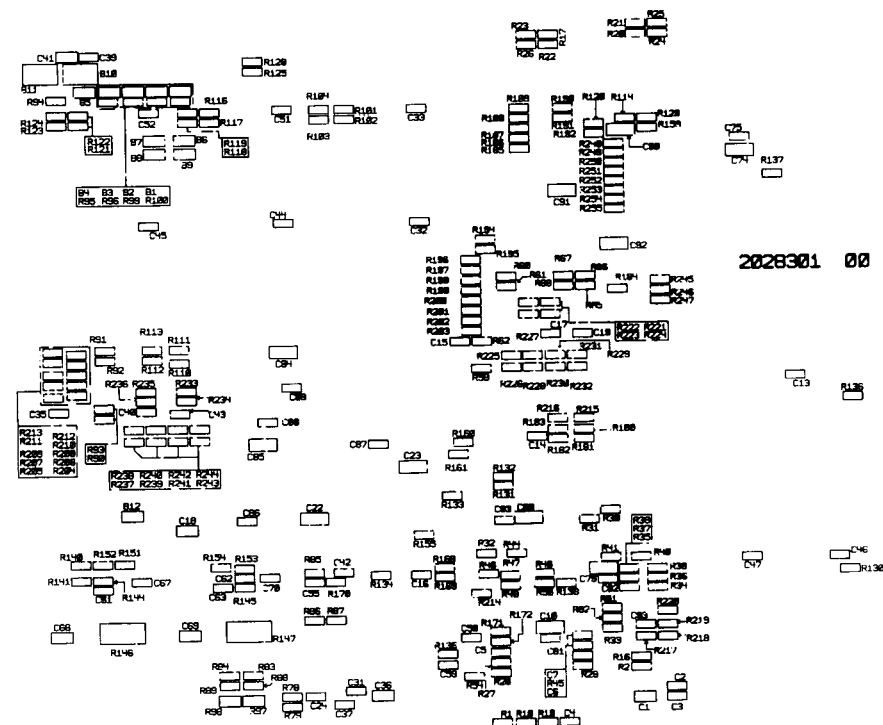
B077 Main Board Component Layout(Soldered Side)
